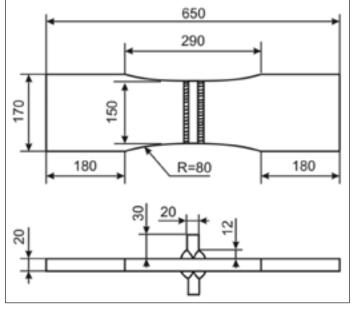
A schematic view of the welded sample used in fatigue testing.
